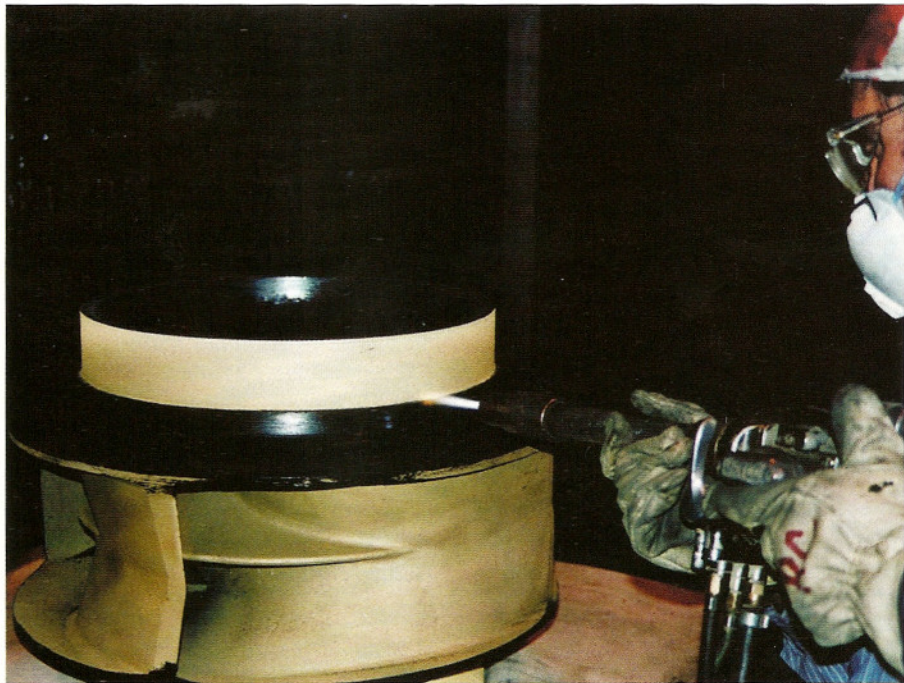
A craftsman rebuilds a ring section of an impeller by flame spraying it with a bronze coating, which will be machined to its final dimensions.
